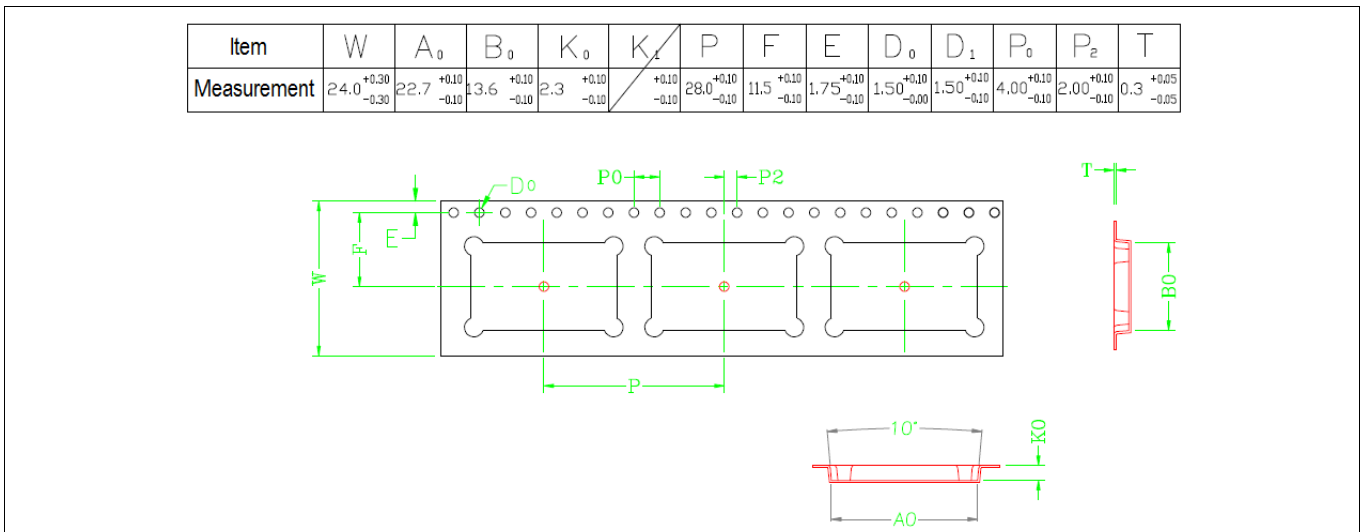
CYW20829B0-P4xxI100 tape dimensions
